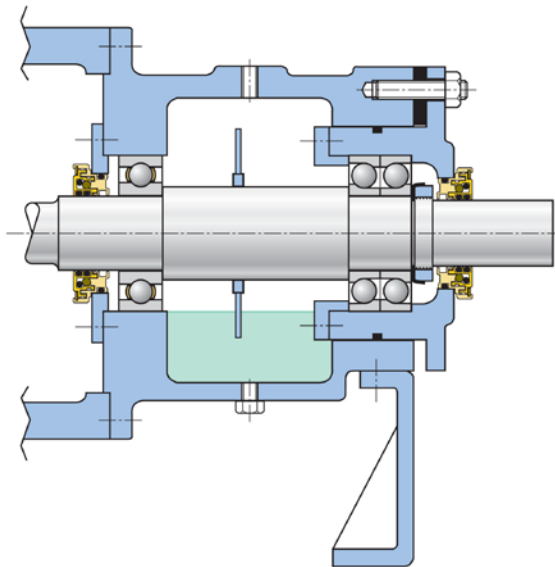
A bearing housing accommodating a cartridge on the outboard side. The bearing housing bore is slightly larger than the diameter of the steel flinger disc, making assembly possible. The drawing does *not* show the desired oil return passage at the 6 o'clock bearing positions.
